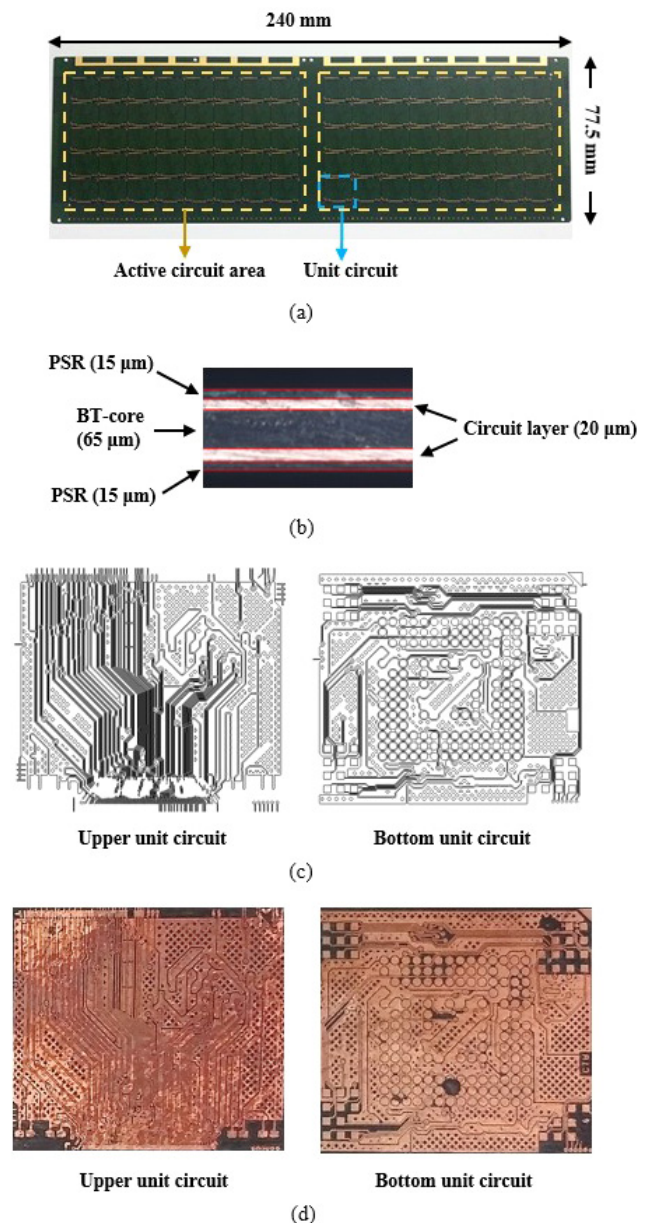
Multi-layer PCB substrate: (a) top view of entire PCB; (b) microscopic image of PCB cross-section; (c) drawing of unit copper circuit; (d) microscopic image of unit copper circuit on BT core.
